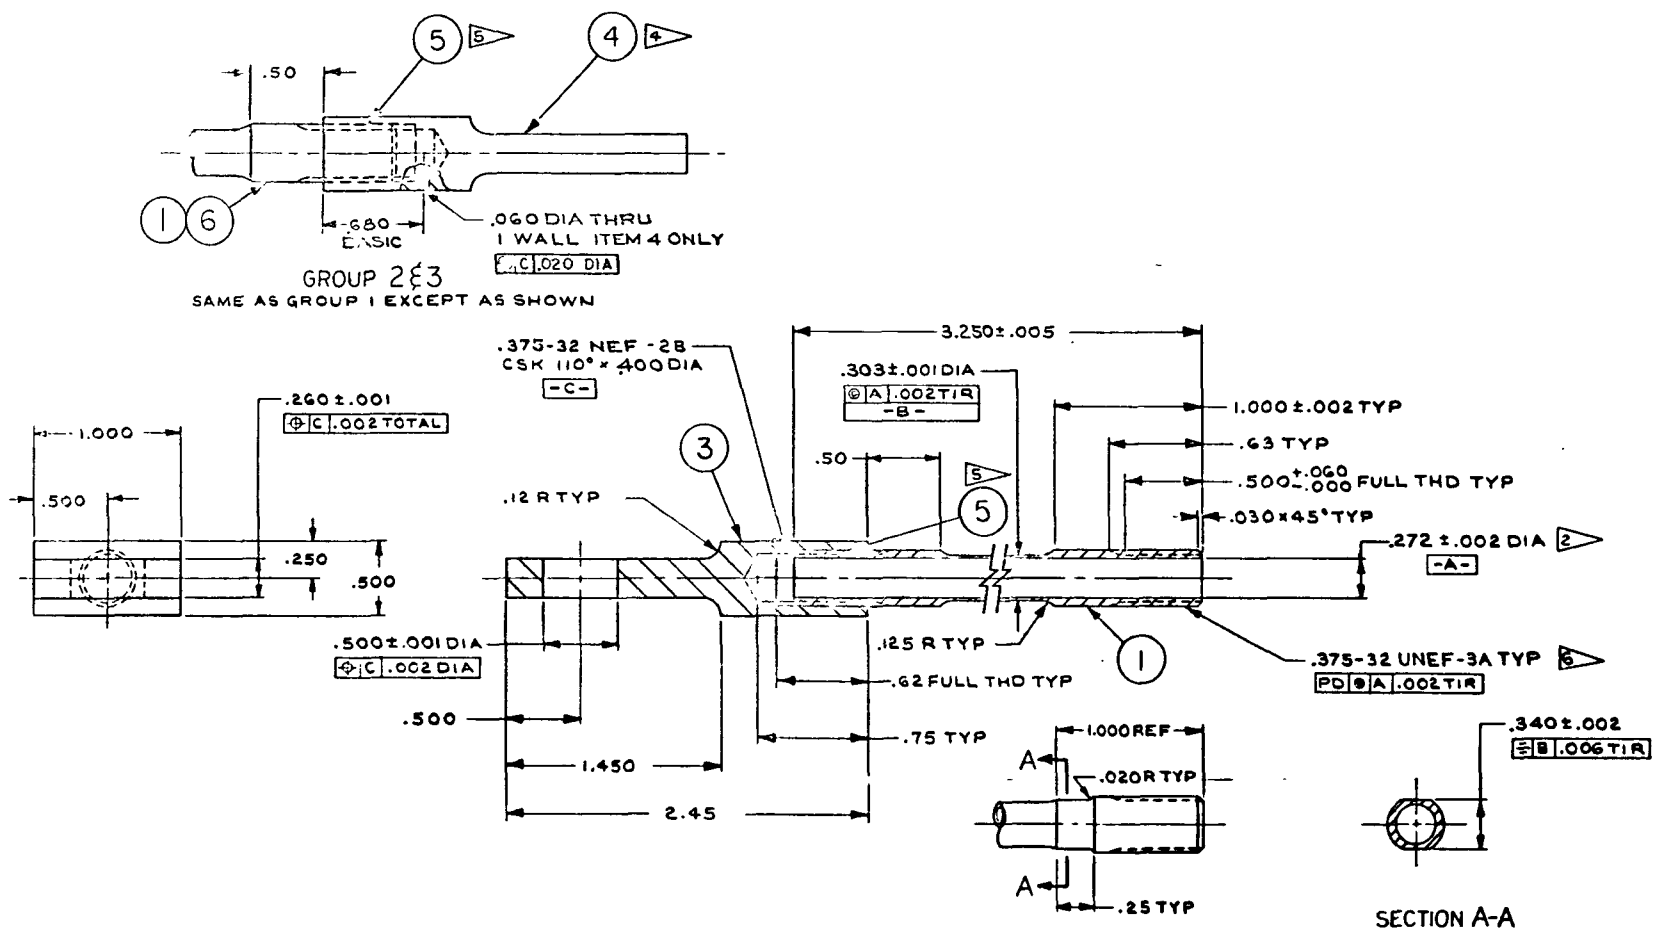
Inconel-718 Tubular & Sealant Specimens
